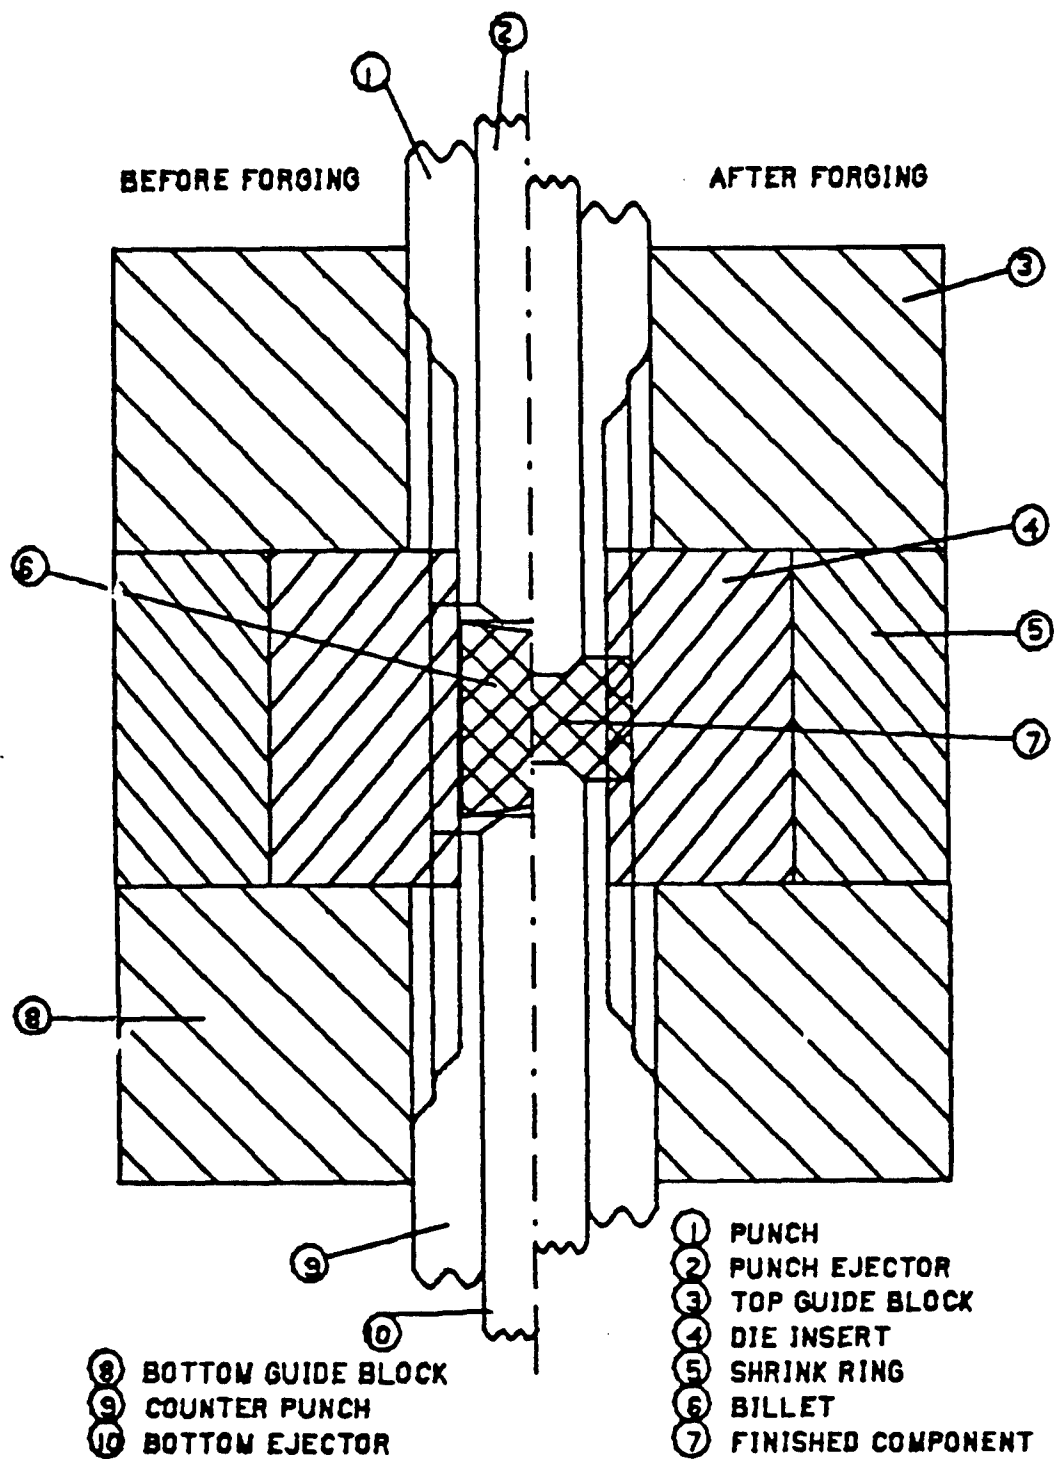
Typical Tool Setup for Forging Spur or Helical Gears
